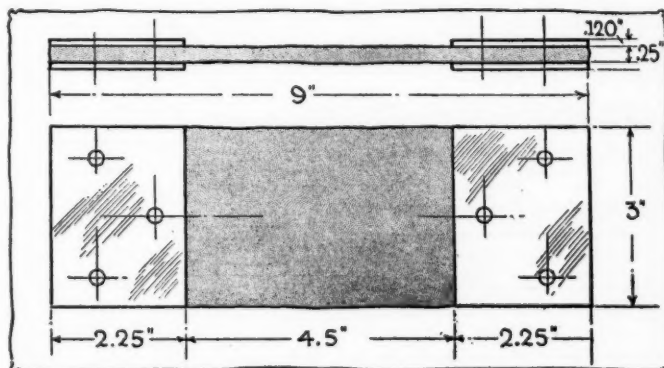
Dimensions of test pieces used to obtain tensile strength of leather
